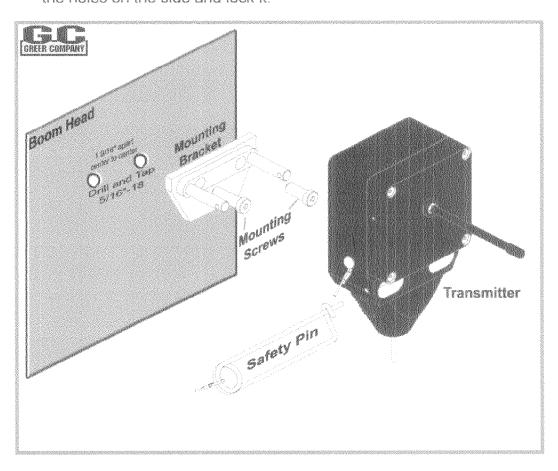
MOUNTING TRANSMITTER USING MOUNTING BRACKET
